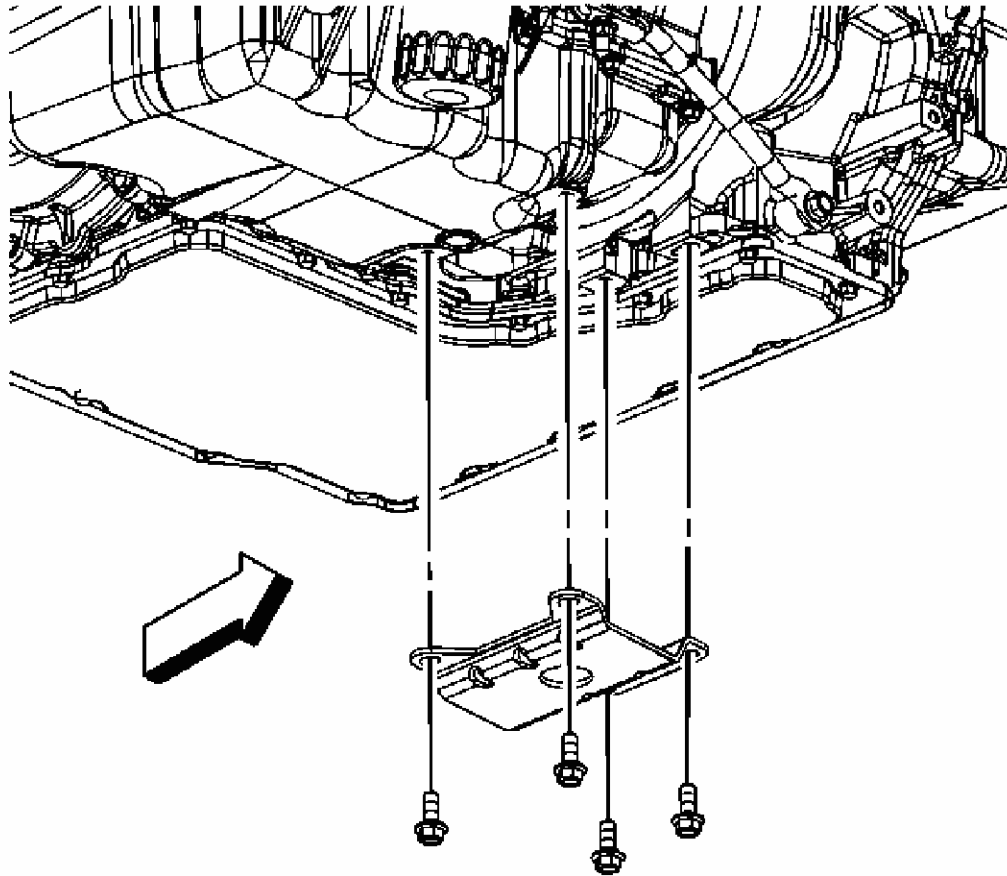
Identifying Transaxle To Engine Brace Bolts
